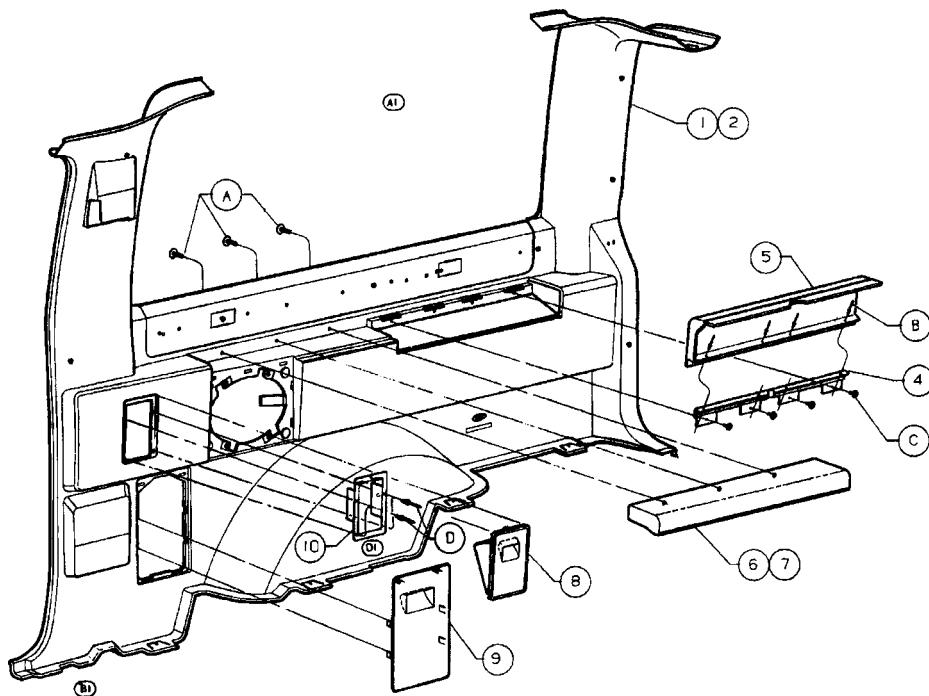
This *assembly drawing* uses an *exploded view* to show how some of the individual parts of an automobile fit together. The individual components are identified by a part number or an entry on a bill of materials (that is not shown here). Adapted from Boyer et al. (1991).
